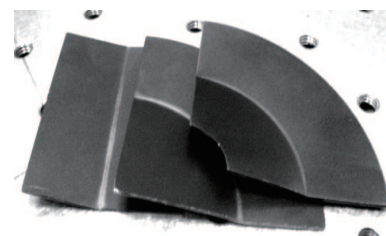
Referenced rectangular, circle-shaped, and ring-shaped specimens (left to right), $\beta = 90^\circ$, $r = 30$ mm.
